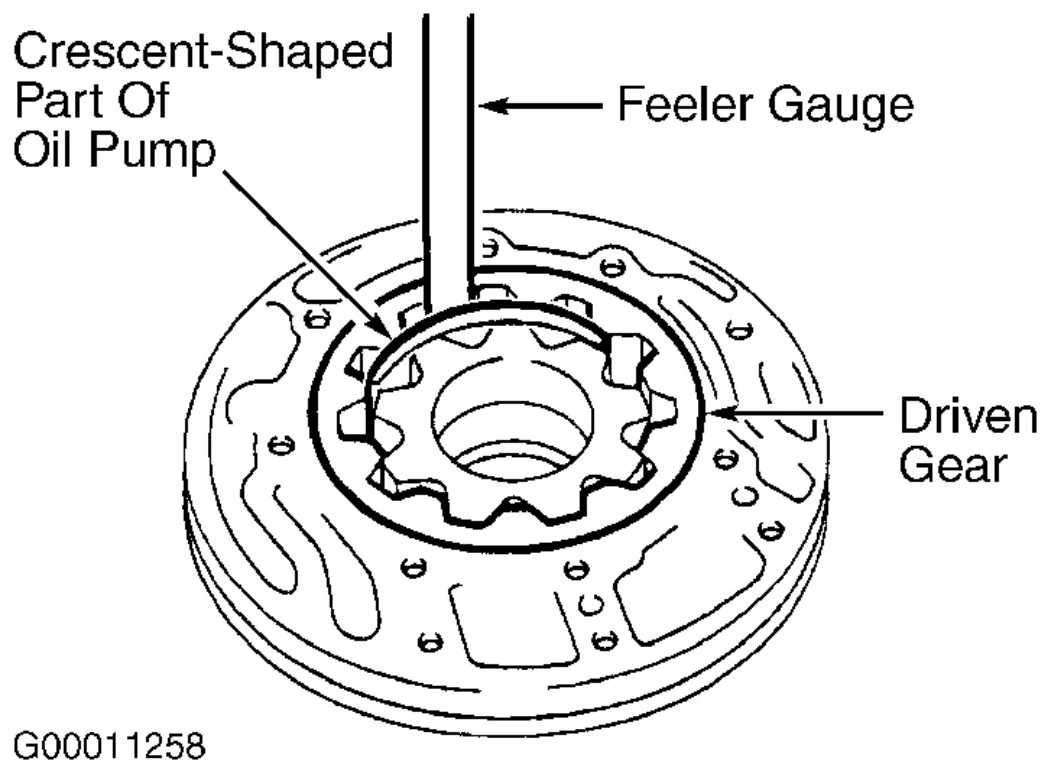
Checking Oil Pump Driven Gear Tip Clearance
